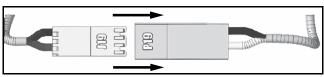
Connect the E-Heat J19 Plug to the Blower P-19 Plug
